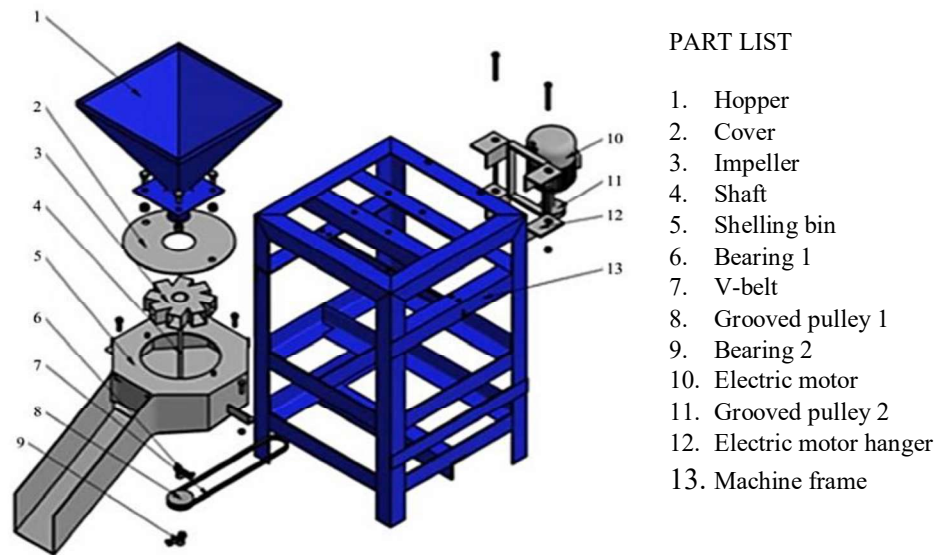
Exploded view showing structural components of a centrifugal cashew nut shelling machine by Kilanko *et al.* (2018)
